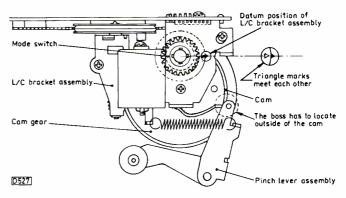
Datum positions of the mode switch and cam gear.
